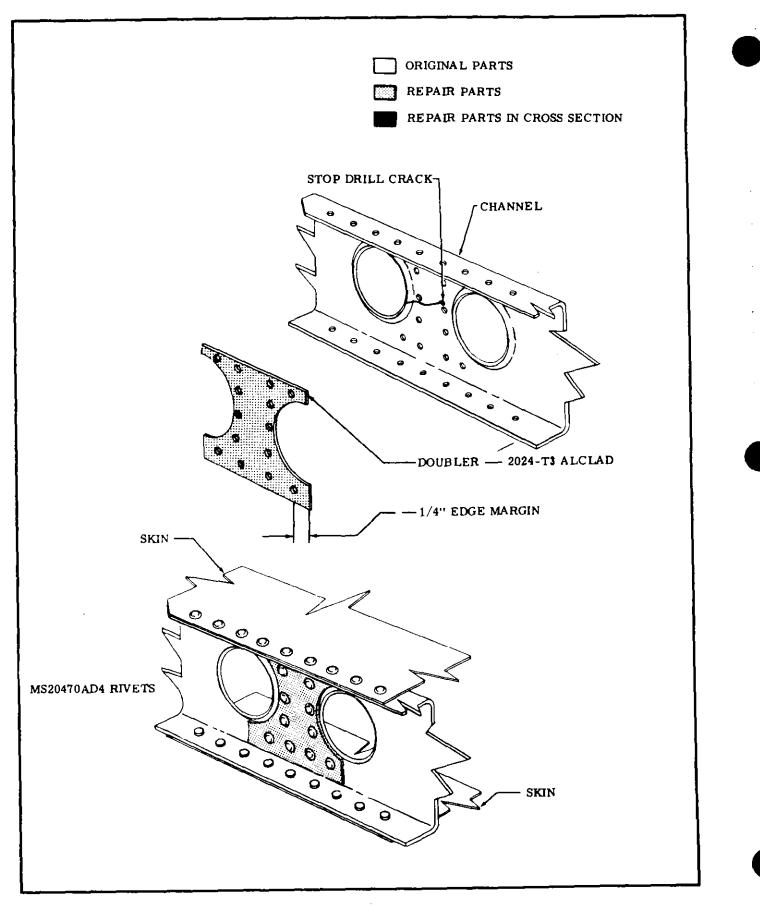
Stringer and Channel Repair (Sheet 3 of 4)
